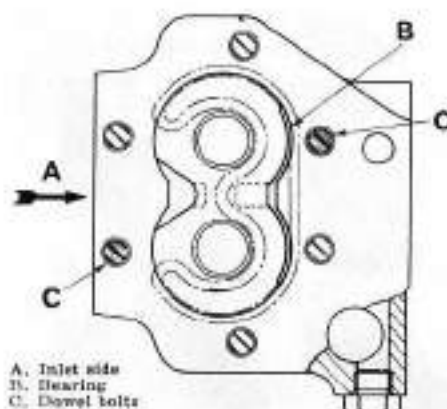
Cross-sectional view of Plessey hydraulic pump; refer to Fig. 193 for exploded view.
